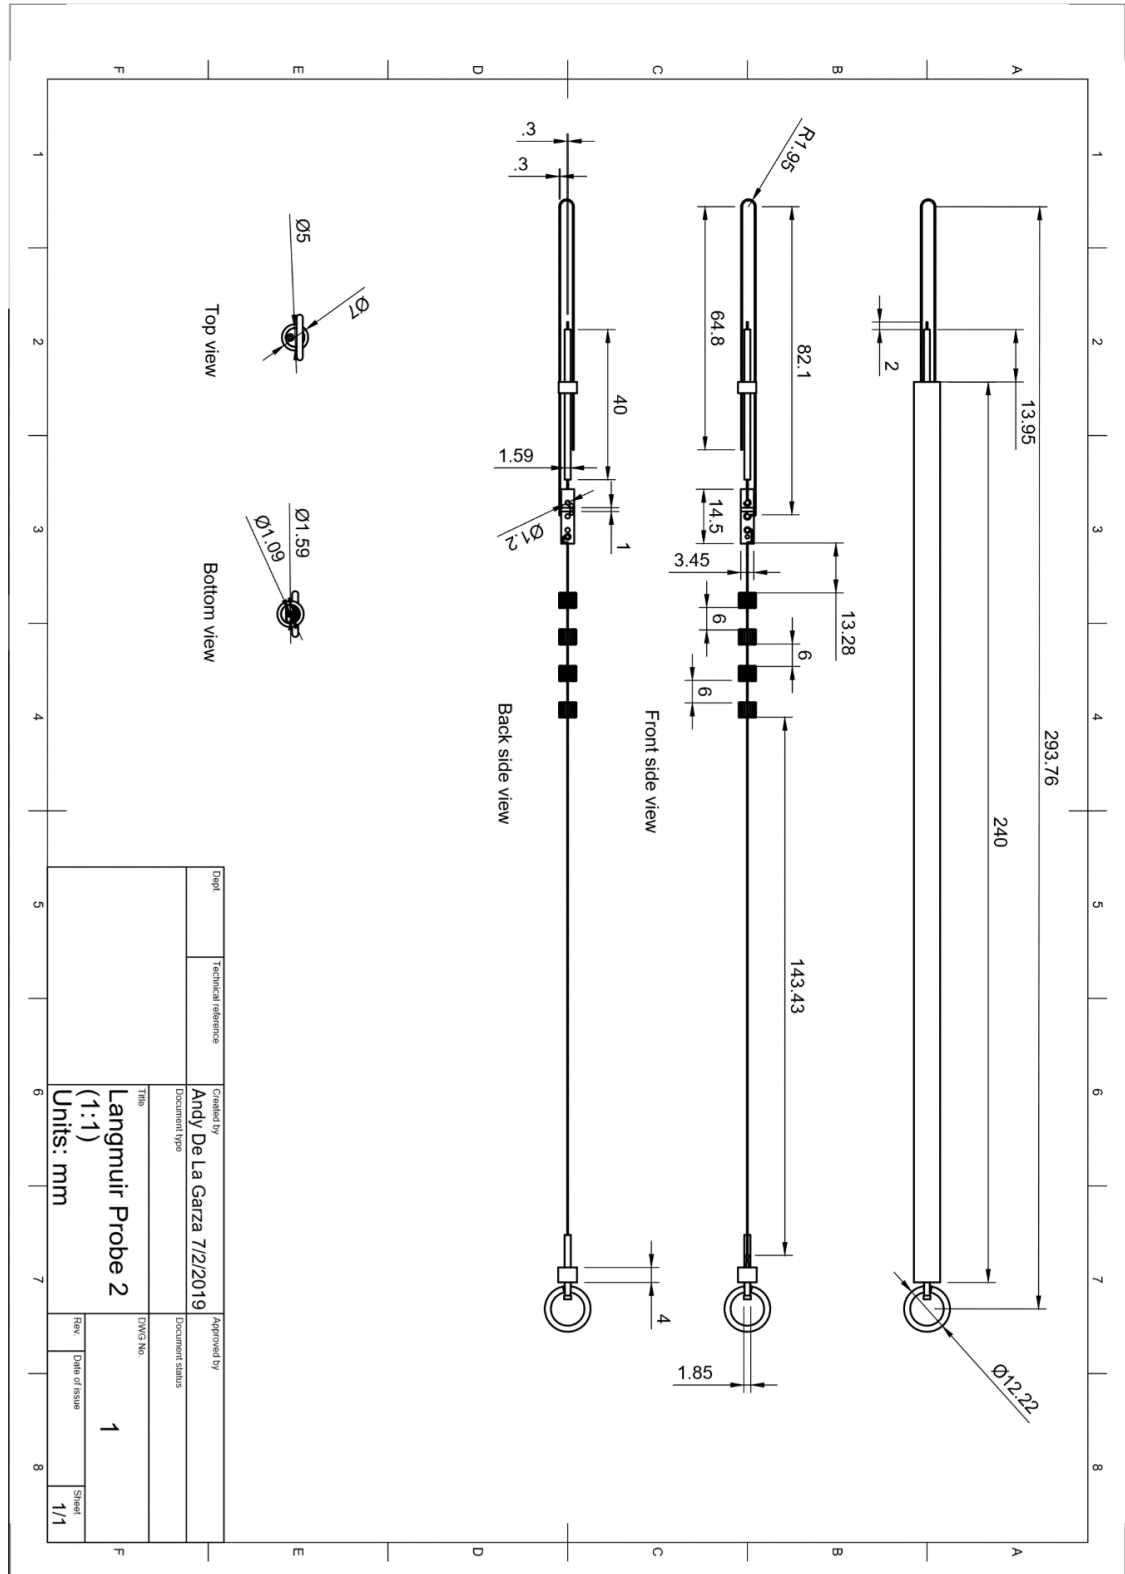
2-D schematic drawing of Langmuir probe with physical dimensions.
